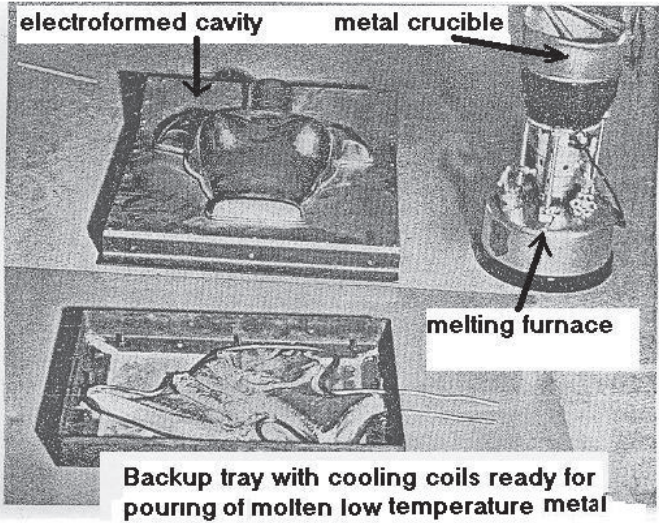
Vacuum Sales Co. L.I., N.Y. sold thin wall electroplated cavities shown being prepared for the metal backup. (1955)
